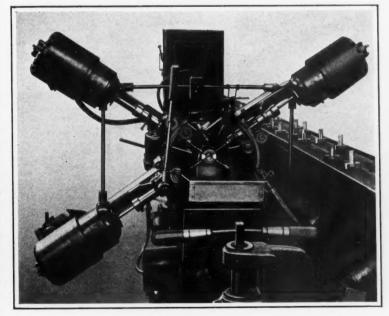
Four-spindle Drilling Machine in which Four Smalldiameter Holes are Drilled in the Wing-shafts
